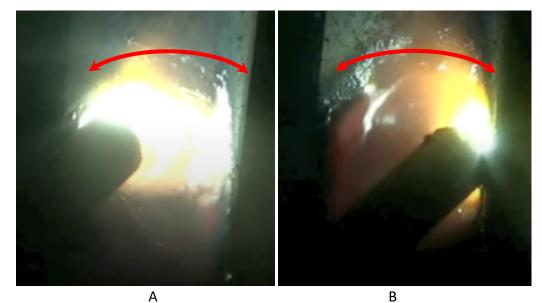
A and B (Collier, 2015, 4:00) showing welding electrode movement from side to side (red arrows). The gap between plates is ¼ inch and the welding electrode is 1/8-inch diameter. Electrode sideways motion is sufficient to allow the weld puddle to freeze on each side of the weld bead.
